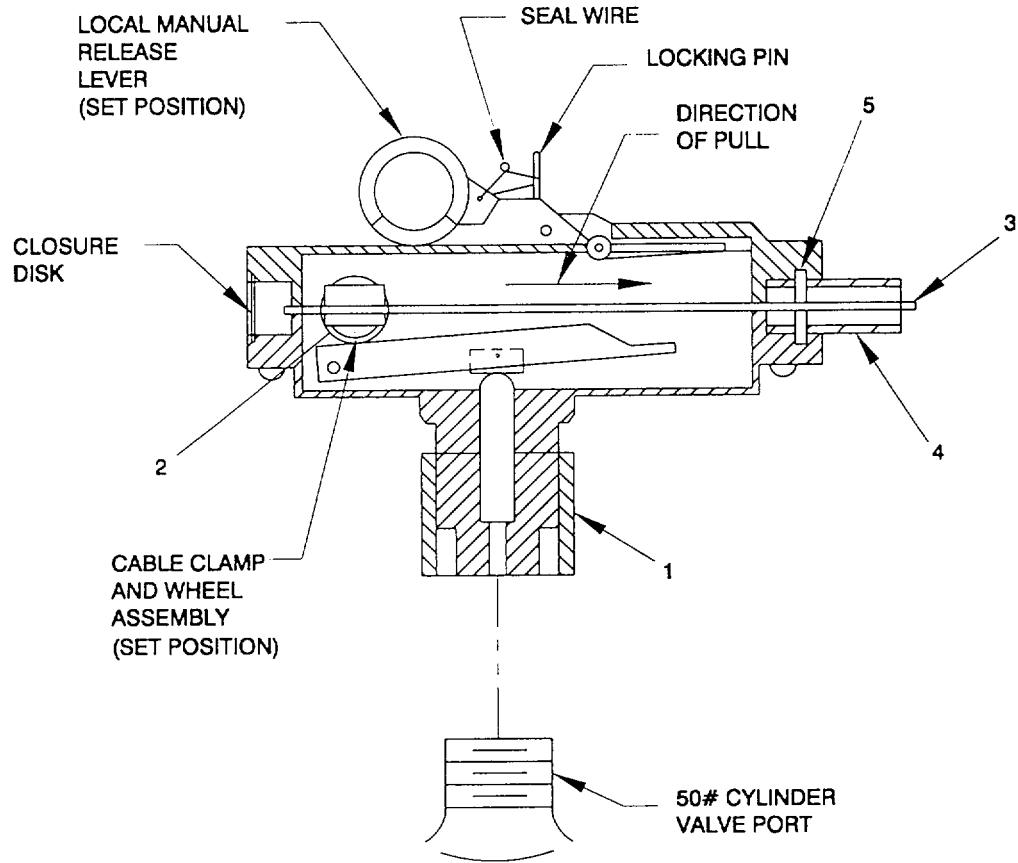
Cable Control Head, Fire Suppression System, Remove/Install
